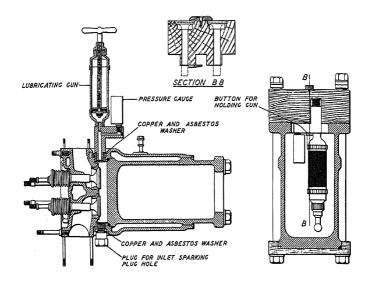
HYDRAULICALLY TESTING VALVE SEATS.
